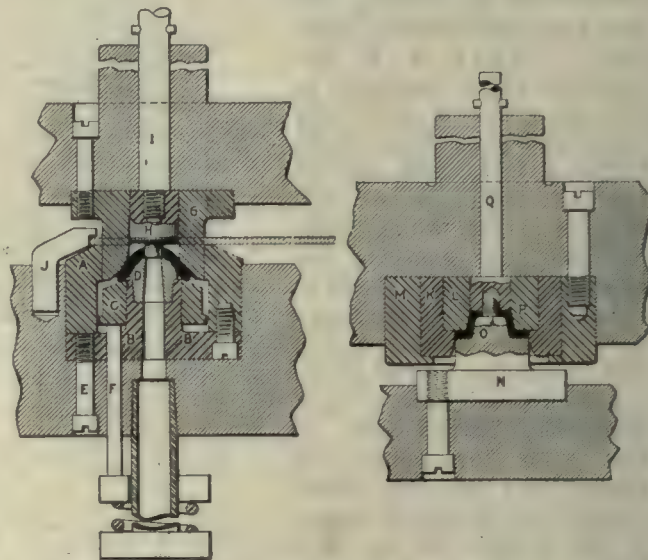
BLANKING, FORMING, AND PIERCING DIES
